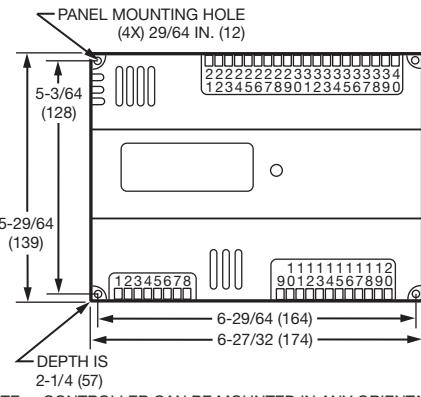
Panel mounting – controller dimensions in inches (mm).
